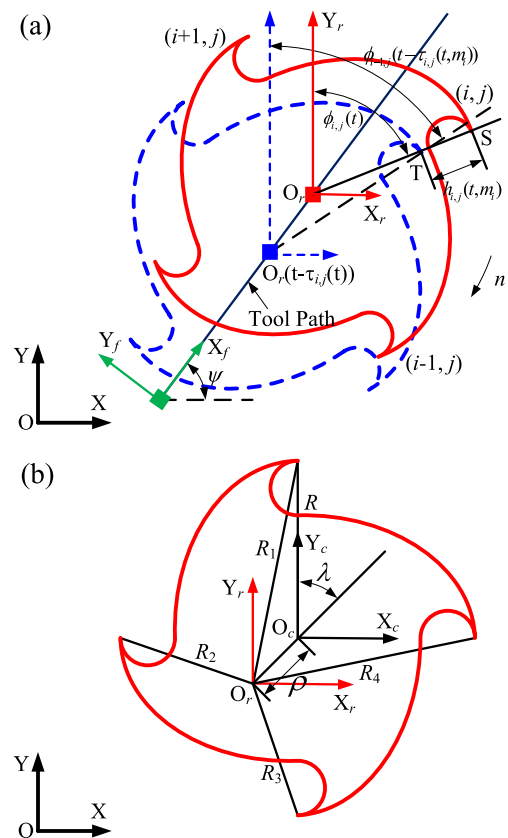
General milling process. a Cutter motion process. b Tool geometry with cutter runout
